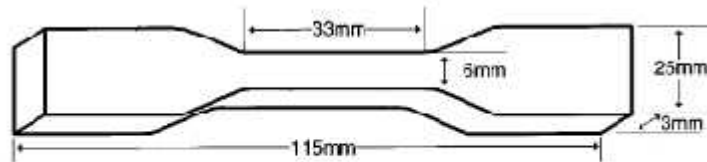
ASTM No. D412 specifications for dumbbell-shaped specimens.
